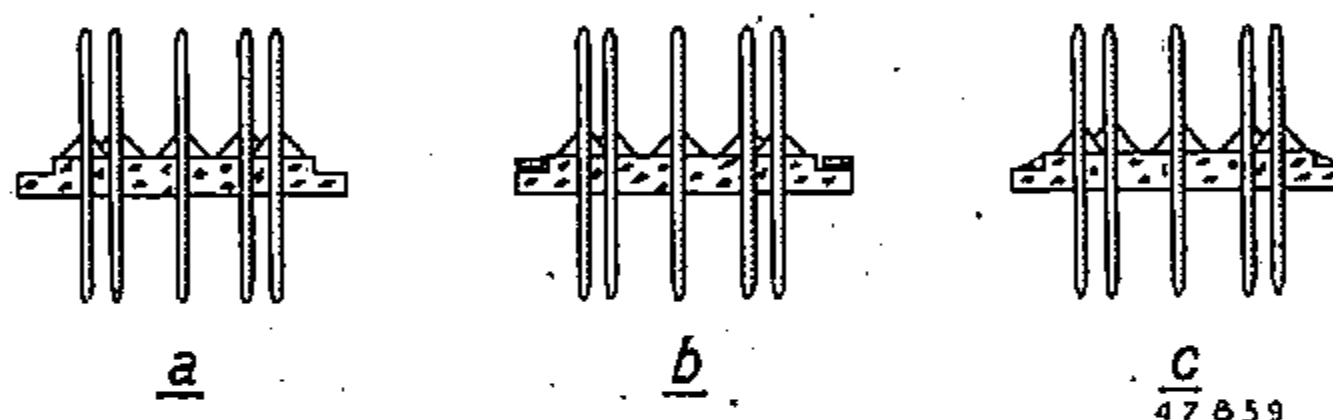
a) Base plate of a radio valve of A series with moulded-in contact pins. Actual size.
